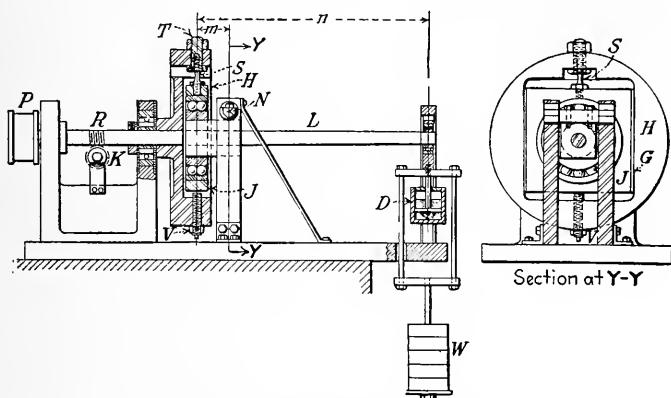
Diagram of axial-stress rotating-specimen-type testing machine. (Jasper.)
